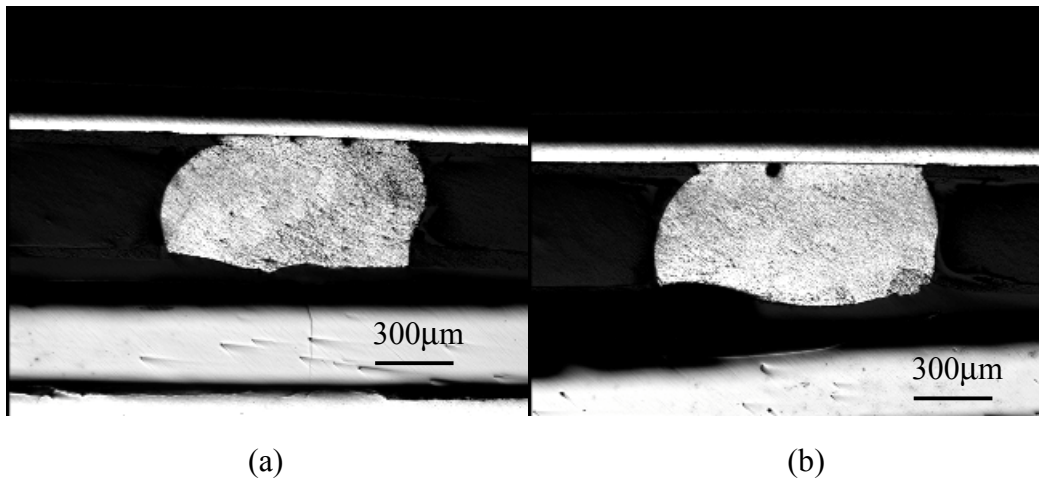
Optical microscopy images of CCB solder joints after 8500 cycles (sample #4,5).
